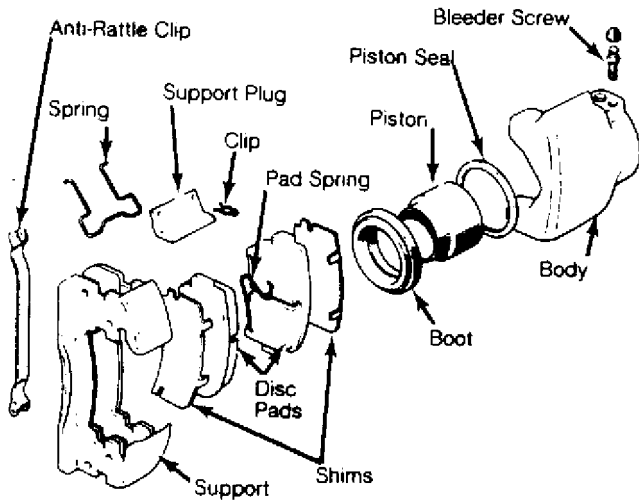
Exploded View of Pickup Front Disc Brake Caliper
